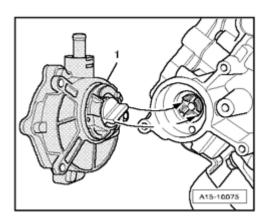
Positioning Vacuum Pump Coupling So That It Engages Symmetrical Groove Of Camshaft When Installing Vacuum Pump
